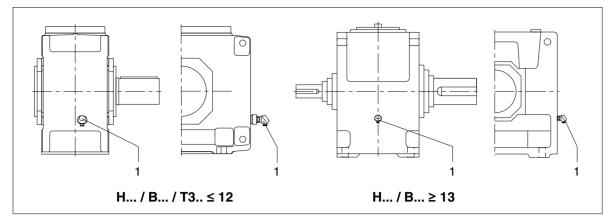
Oil-temperature measurement on gear units types H..., B... and T3..
